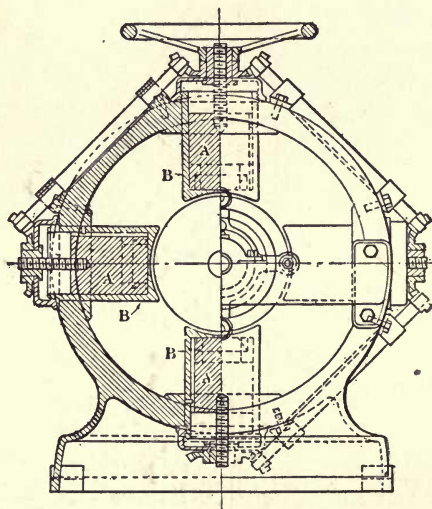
STOW ADJUSTABLE-SPEED MOTOR.
